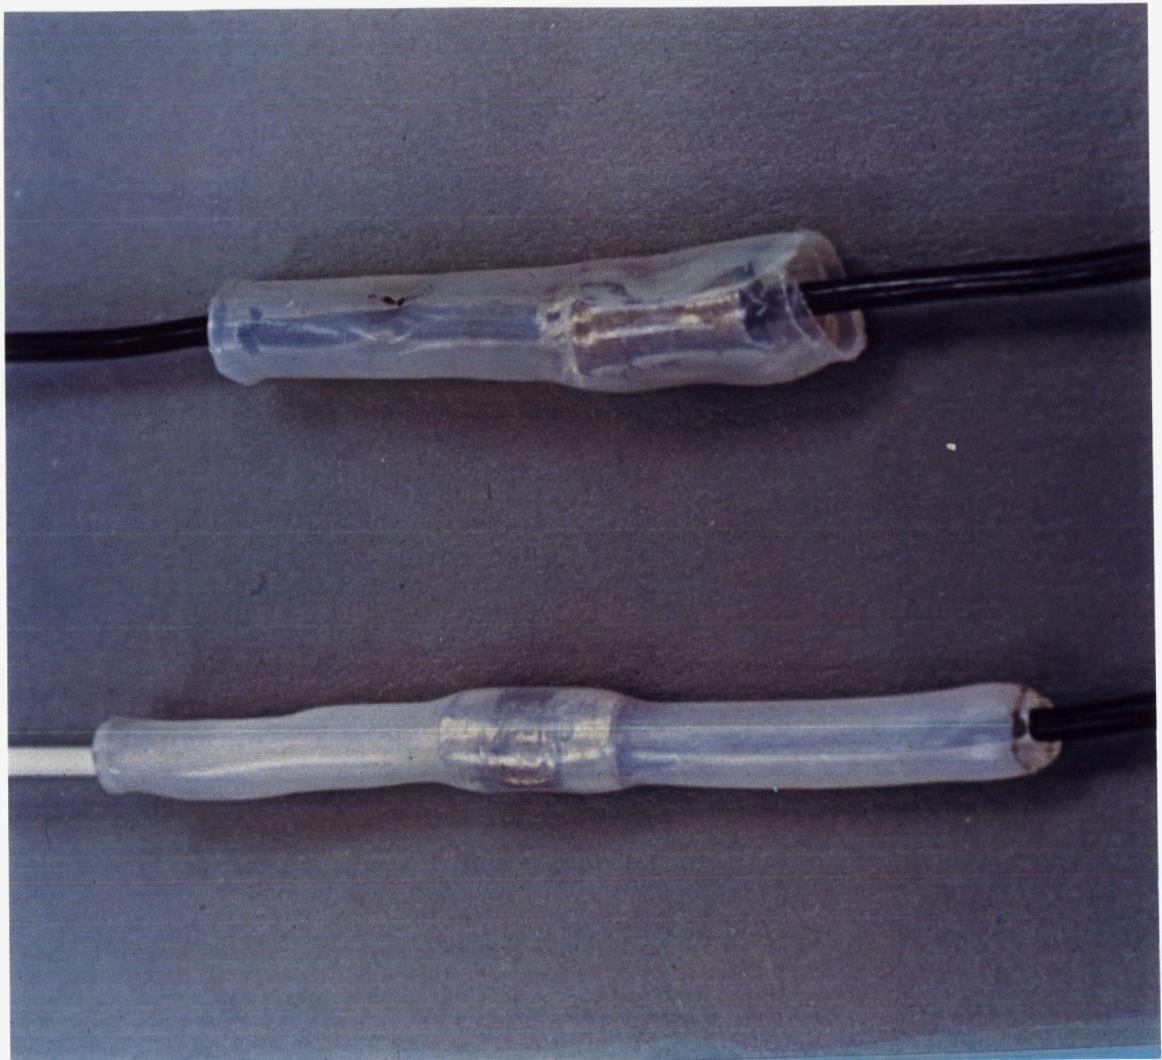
Heat Shrink Sleeves—Examples of Proper (lower) and Improper (upper) Shrinking
